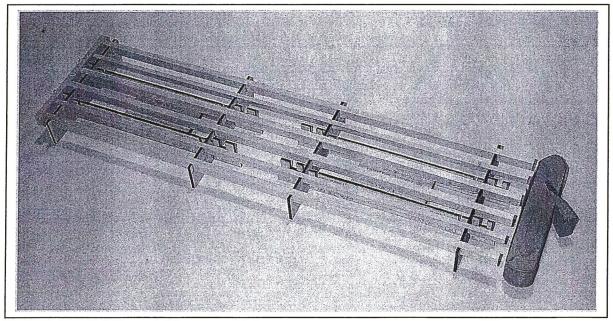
Sills trued up with sanding block. Jig slid out of the way.
